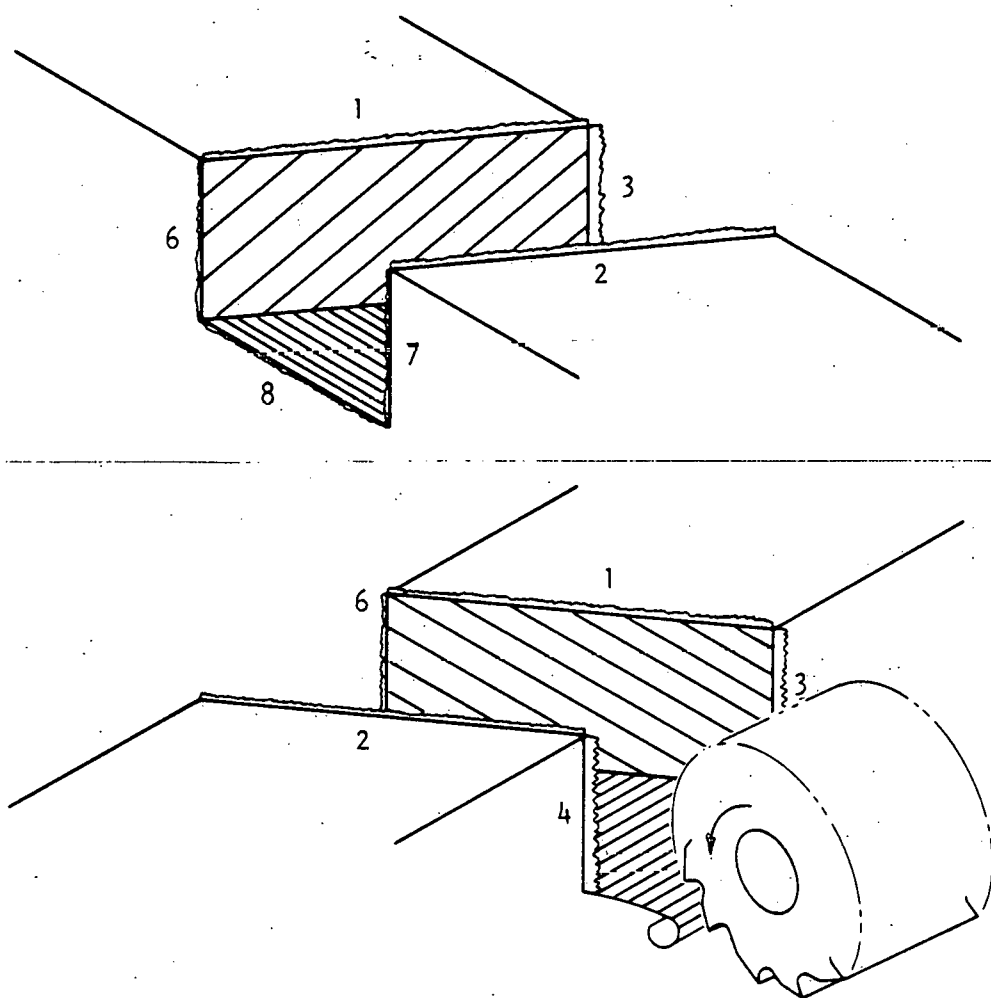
Burrs Produced in Side Milling (Conventional Cut)
